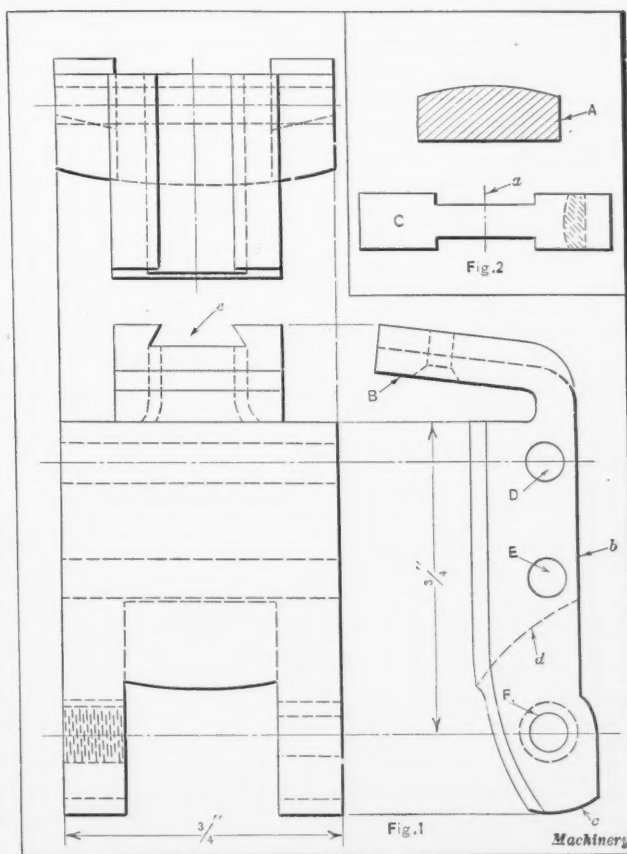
Piece machined from Half-hard Drawn Steel. Fig. 2. (A) Cross-section of Drawn Steel Stock from which Part shown in Fig. 1 is made; (C) Partly Machined Piece as it appears before being cut off at (a) to form Two Parts
